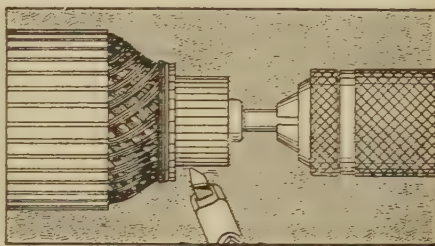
Top View, showing Angle of Cutting-tool Holder.
